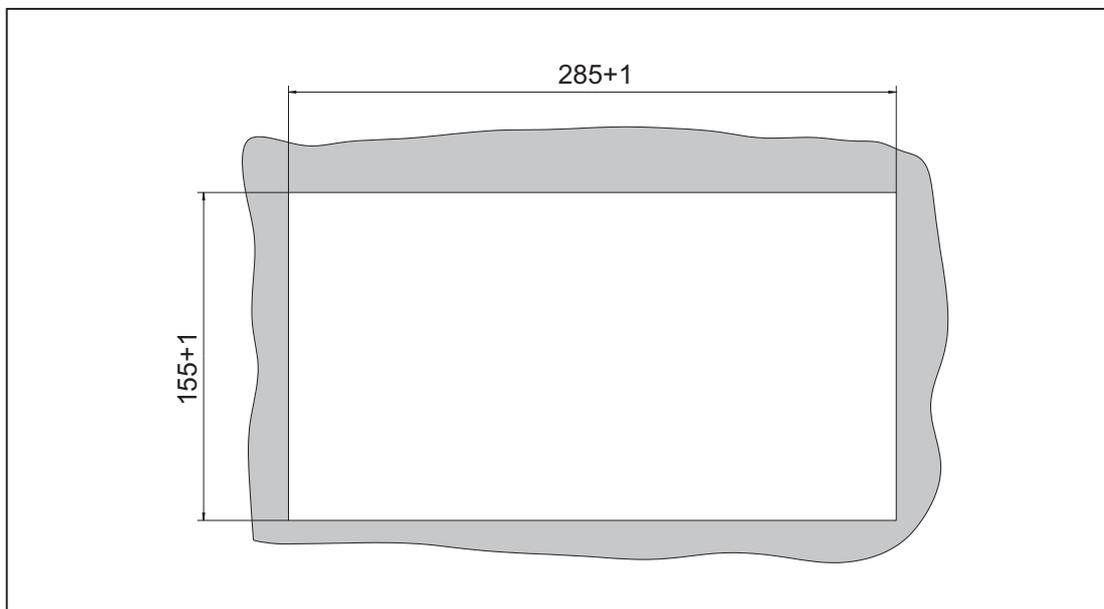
Panel cutout for CNC full keyboard KB 310C (plate thickness 1.5 - 6.0 mm)
